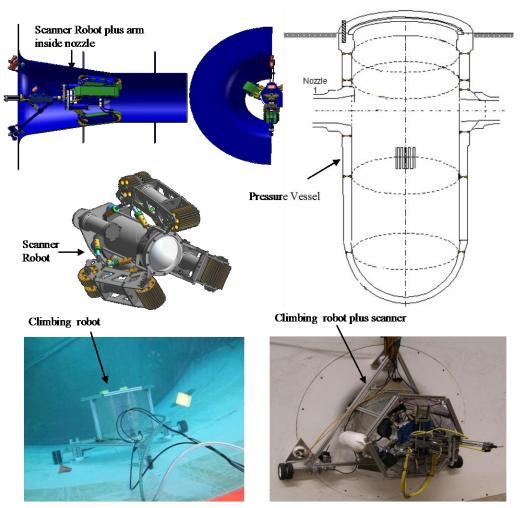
RIMINI wall climbing and pipe crawling robot for the NDT of welds inside pressure vessel nozzles
